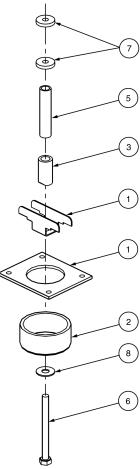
Horizontal Pump in Tank Assembly D3700, Rev A
